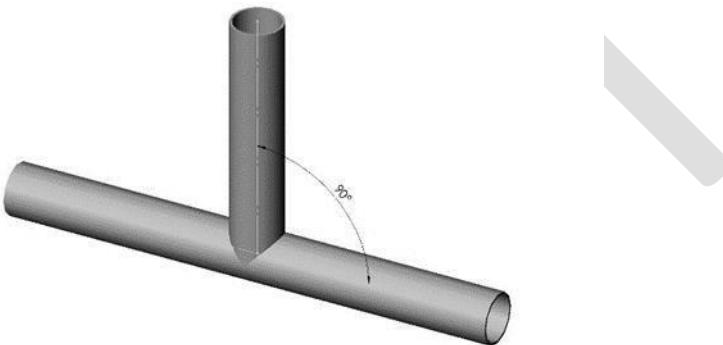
Roll Cage, Welding Sample 1
